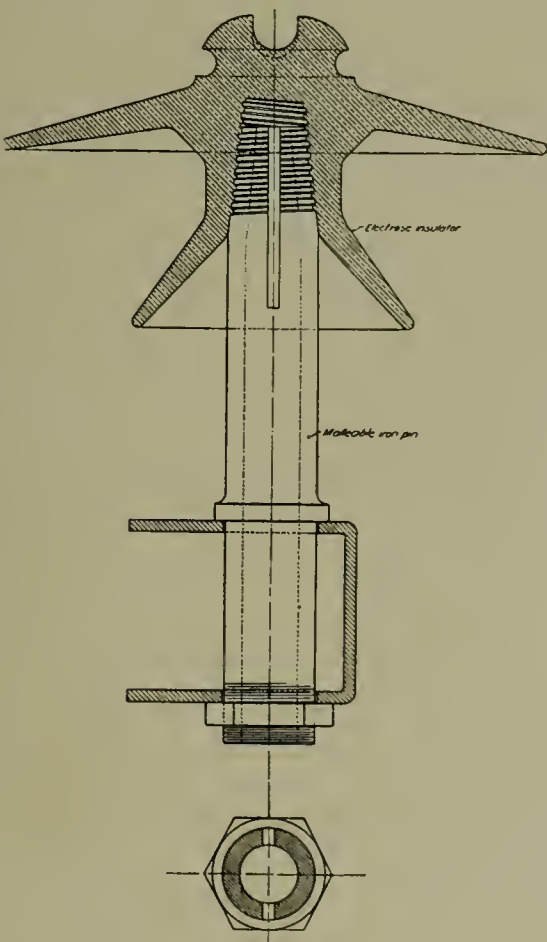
SECTION OF INSULATOR FOR THE BUFFALO TRANSMISSION LINE. MANUFACTURED BY THE ELECTROSE MANUFACTURING COMPANY, BROOKLYN, N. Y.
